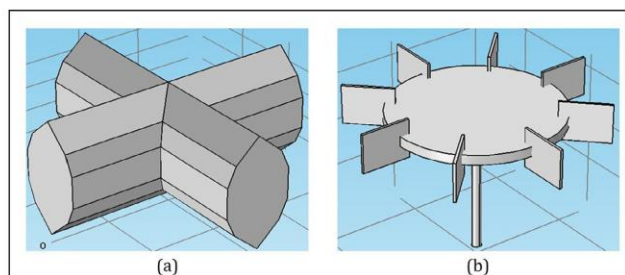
(a) 'plus shaped' magnetic stirrer bar and (b) 8 blade Rushton impeller.
